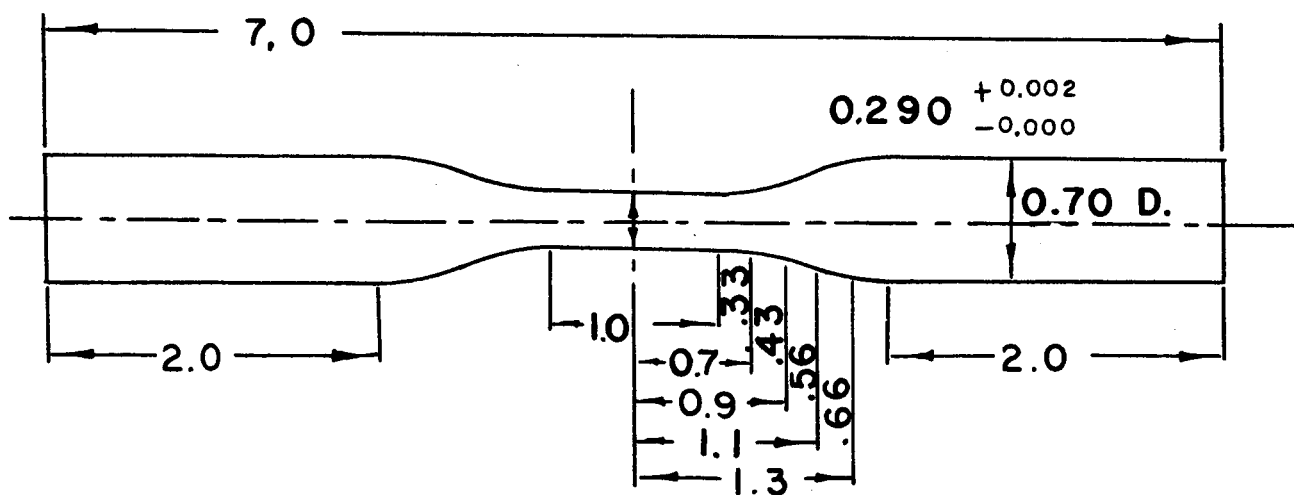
THE COPPER (O.F.H.C.) FATIGUE SPECIMEN.
